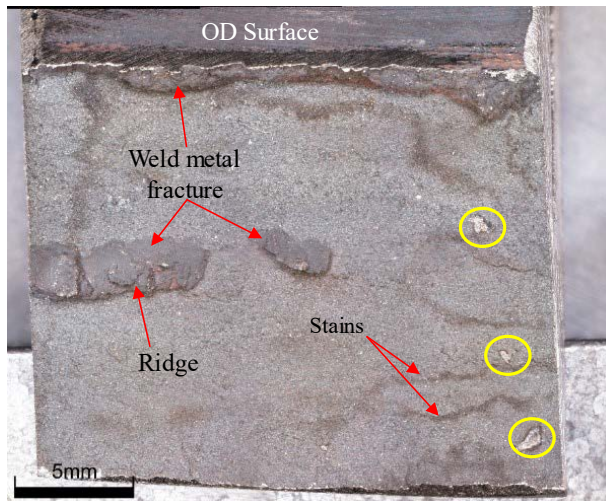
Macroscopic image of the fracture surface from the boat sample on the base metal side
